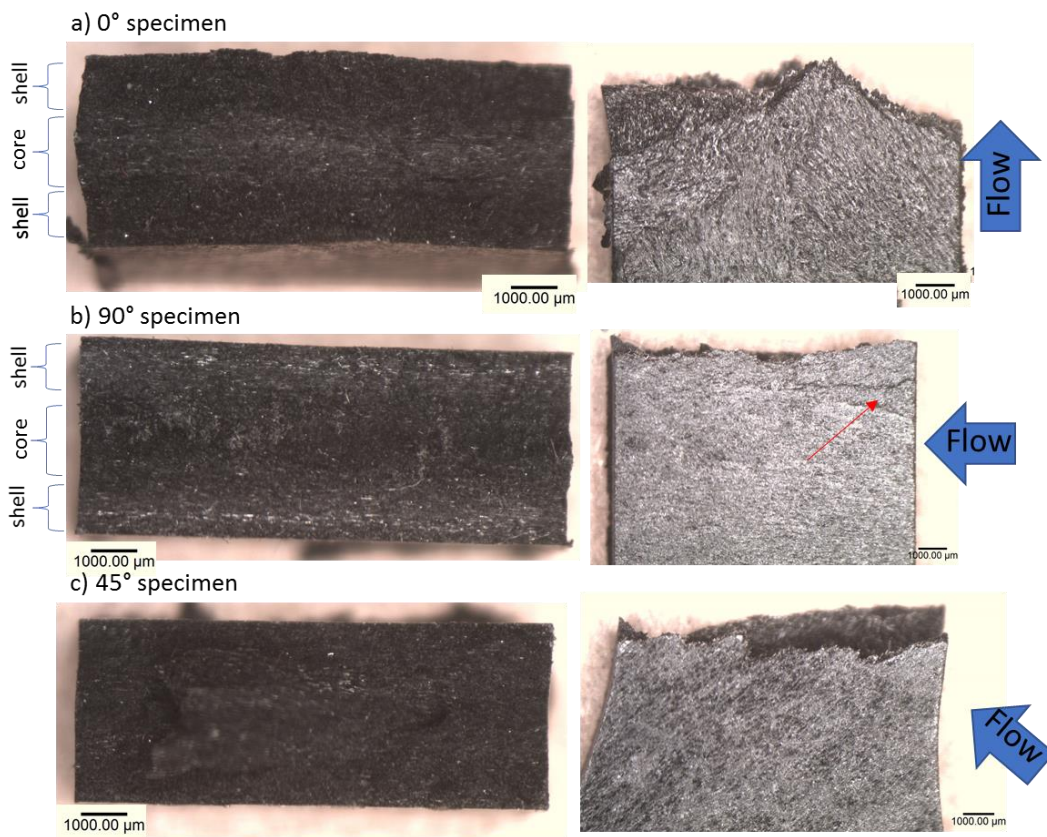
Optical view of the fracture surface for tensile tested specimens at a) 0°, b) 90° and c) 45° orientations.
